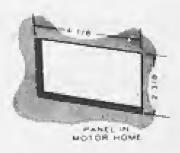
MOTOR HOME CUTOUT FOR 390-0986 DELUXE CONTROL PANEL
